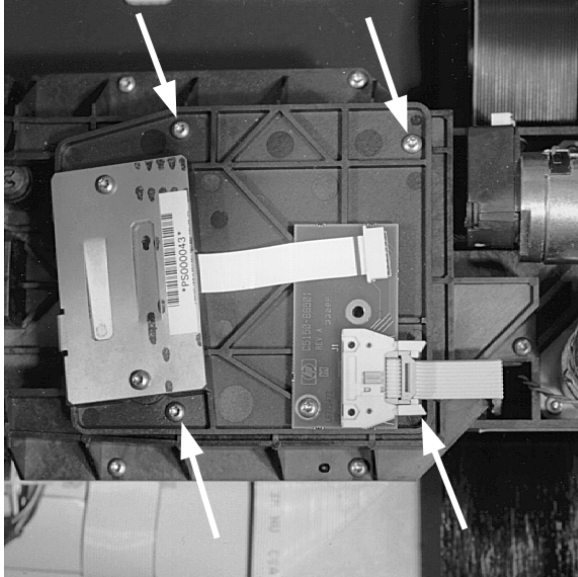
Bar Code Reader Assembly and Interface Cable
